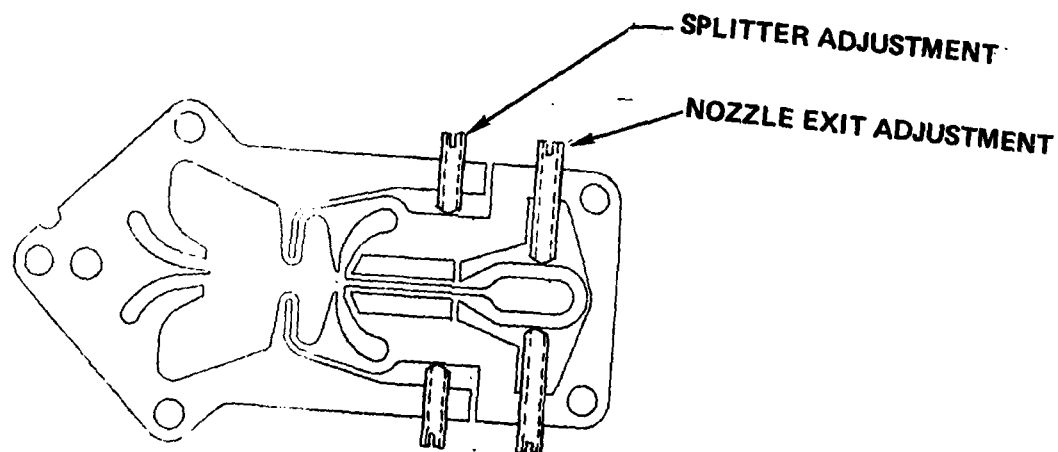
Cross-sectional view of LJARS with mechanical adjustments to reduce null offset.
